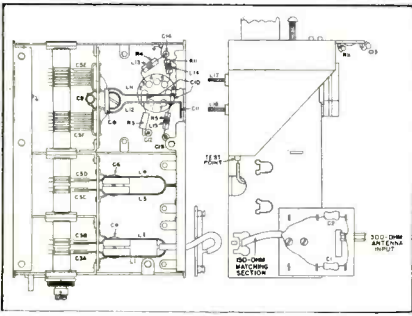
Base layout of UHF Tuner-Adapter, with Oscillator and Mixer Boards removed.
